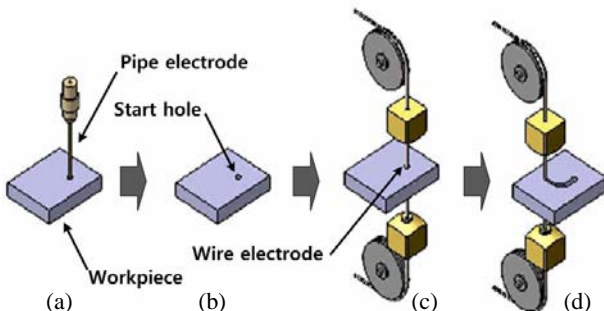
Process to make a lead frame die ; (a) ED-drilling (b) a start hole (c) insert wire electrode (d) wire EDMing
